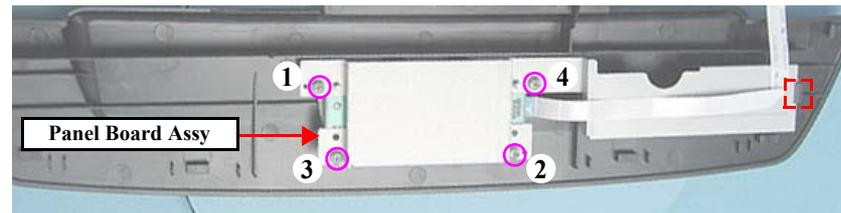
Removing the Shield Plate PNL (R260/R265/R270)
